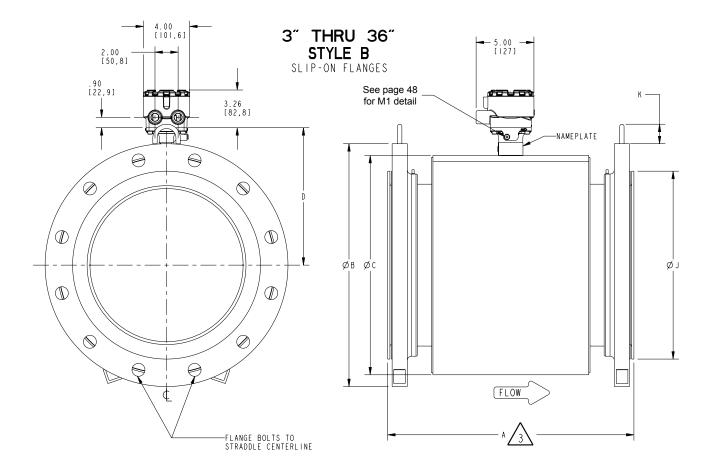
8705-M Flanged Sensor 3-in. to 36-in. (DN 80mm to 900mm) slip-on flanges—low pressure (P ≤ Class 300)
